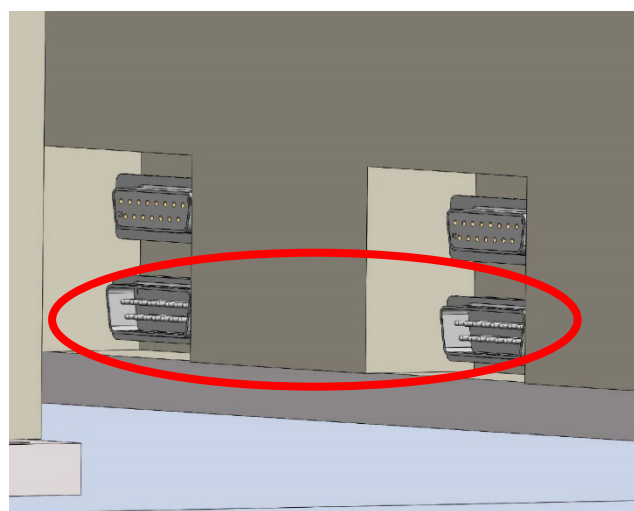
Controller D-Sub Cables plug into bottom D-Sub ports circled in RED.
